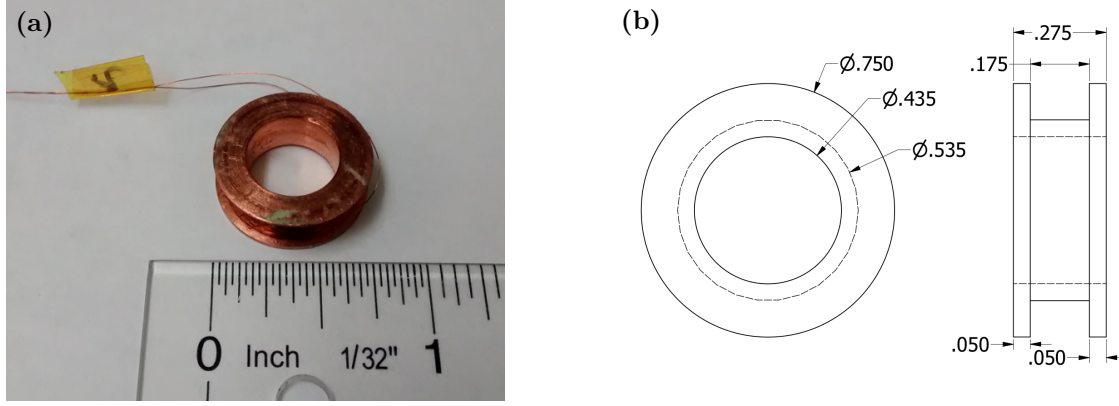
(a) A photograph of a superconducting solenoid made of a copper bobbin and NbTi superconducting wire. (b) CAD drawing showing dimensions of the copper bobbin. The unit is inch.
